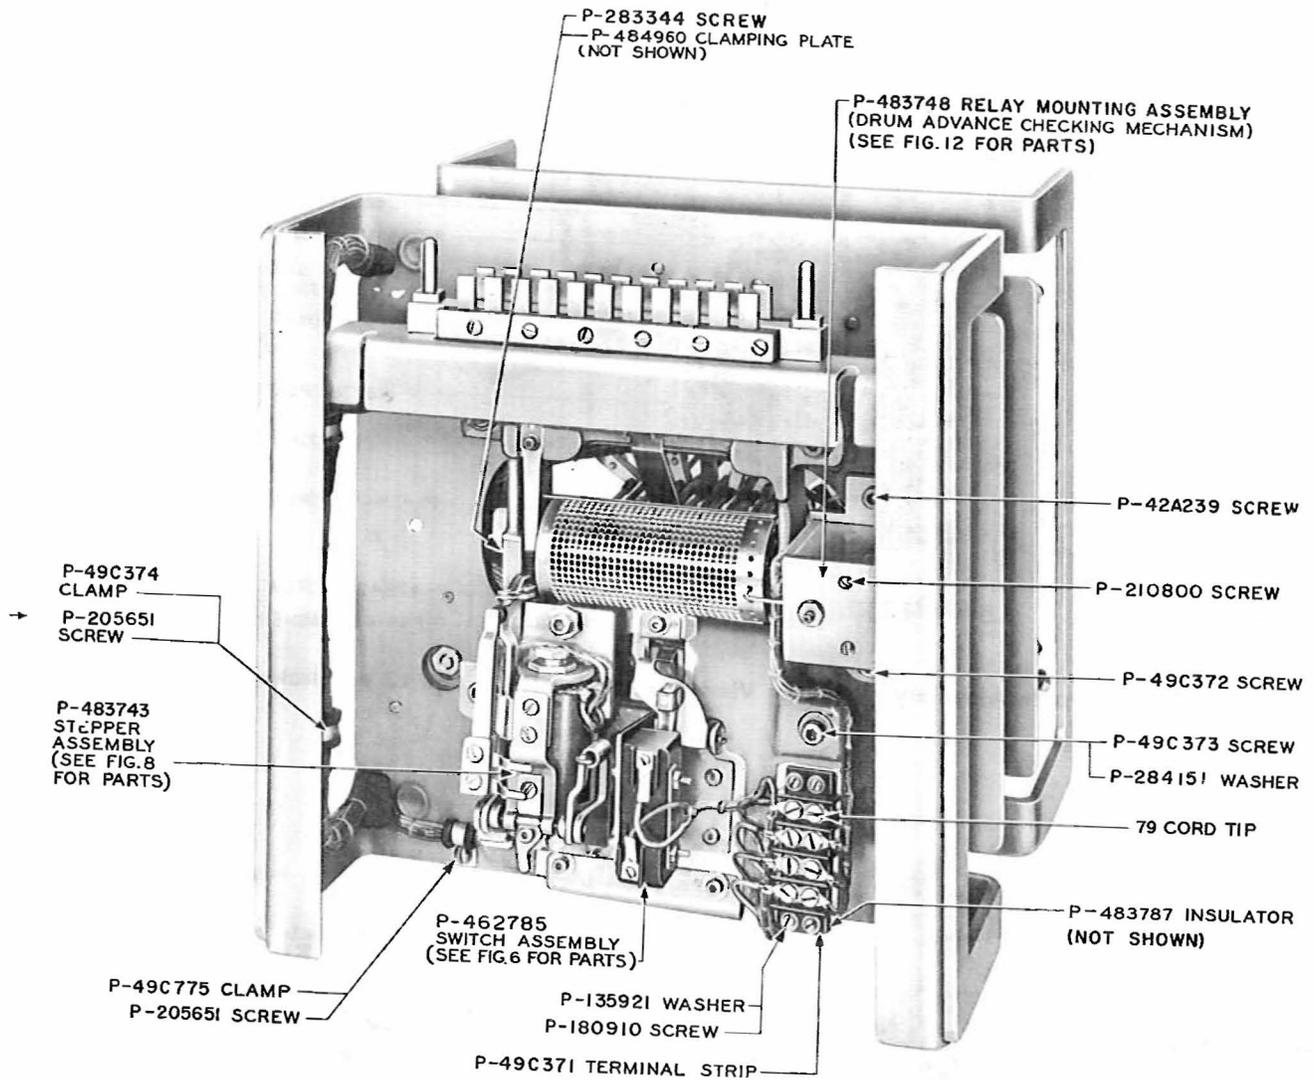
KS-13882 L2 Perforator - Bottom View
